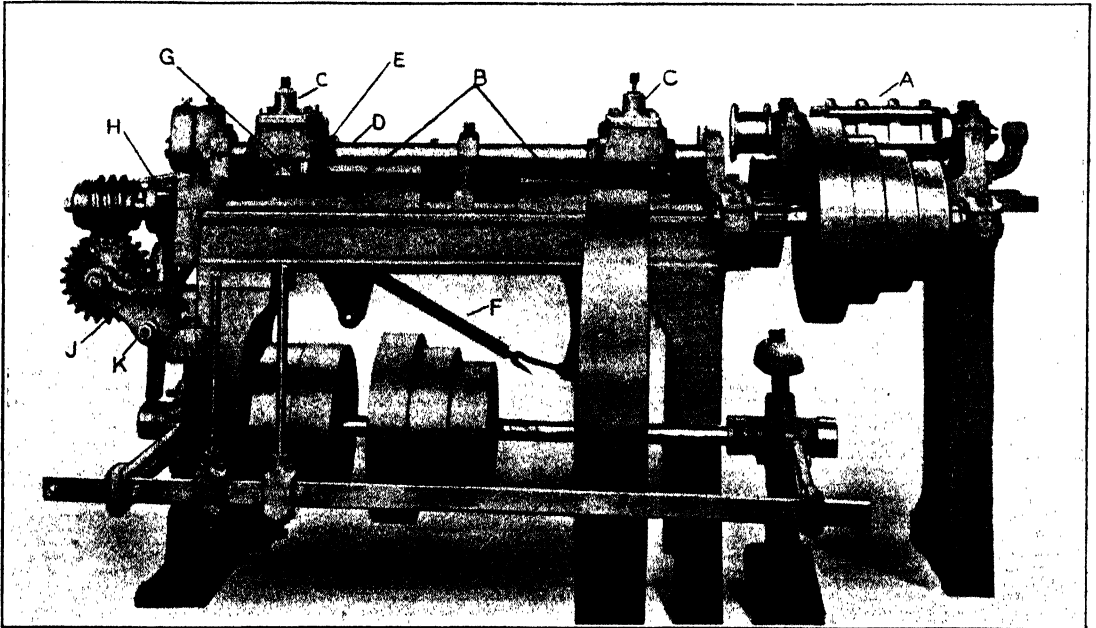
STRAIGHTENING AND CUTTING-OFF MACHINE—G. CROSSLEY.
